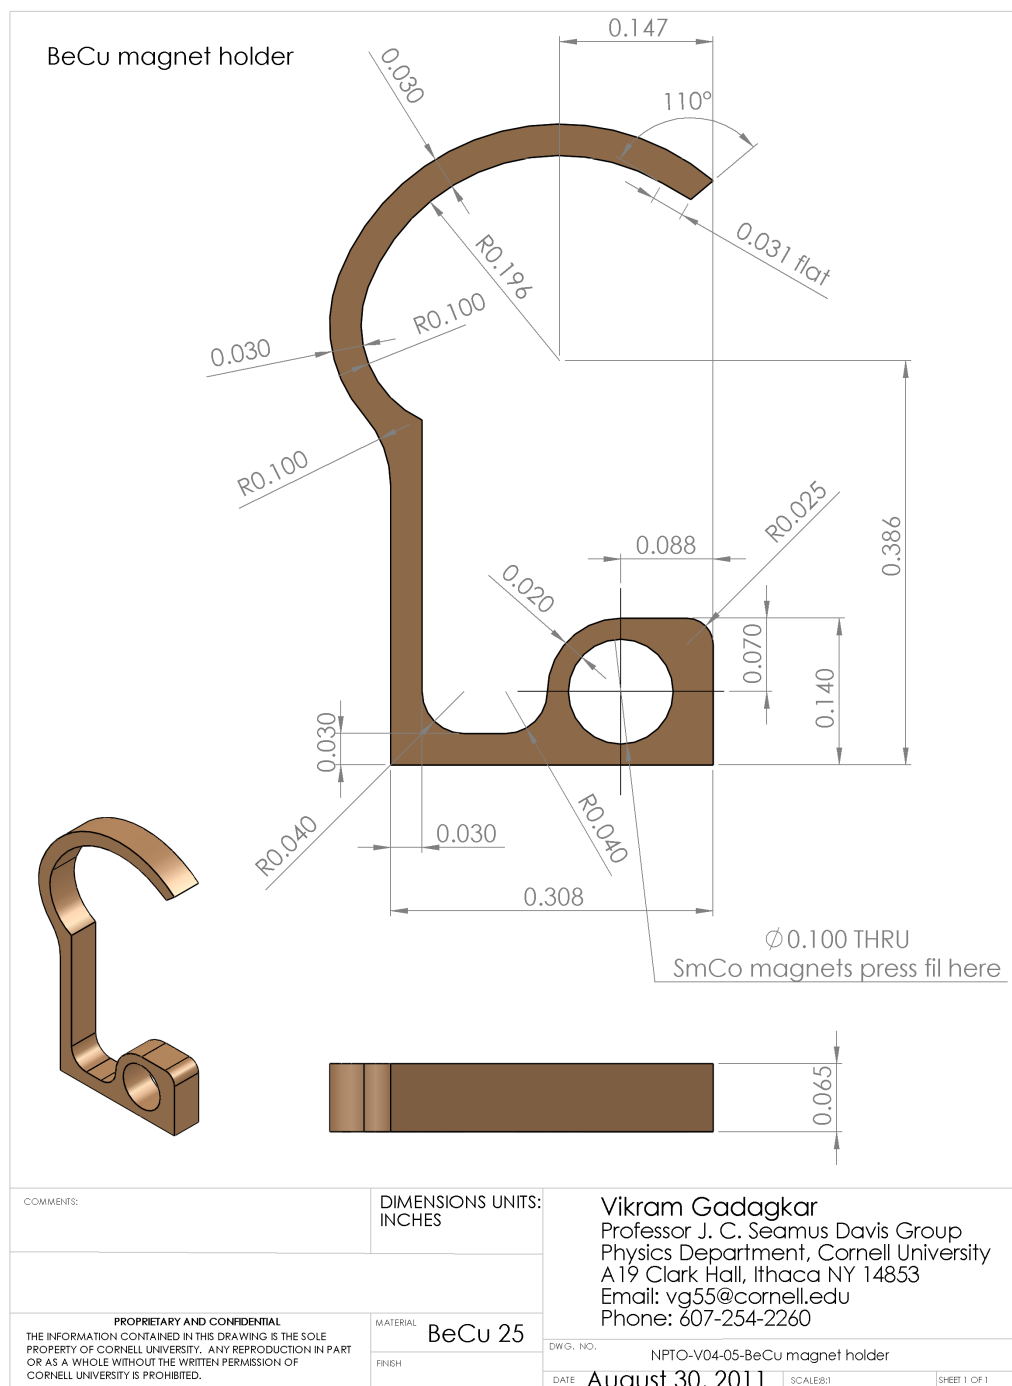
Beryllium Copper magnet holder. This piece holds a samarium cobalt magnet used in the SQUID detection scheme. The holder is designed so that it can be clipped on to the torsional oscillator body and then glued in place by a drop of fresh Stycast. BeCu was chosen to that good thermal contact is maintained between the magnet and the torsion rod at all times.
